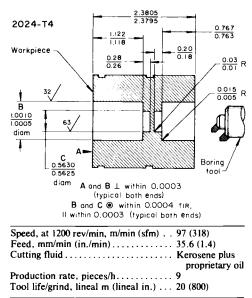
Rough and finish boring of a heat-treated aluminum alloy forging. Dimensions in figure given in inches
